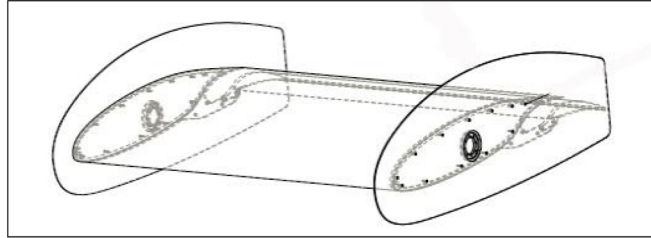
End Plates Installed on NASA LS(1)-0417 Wing Section
